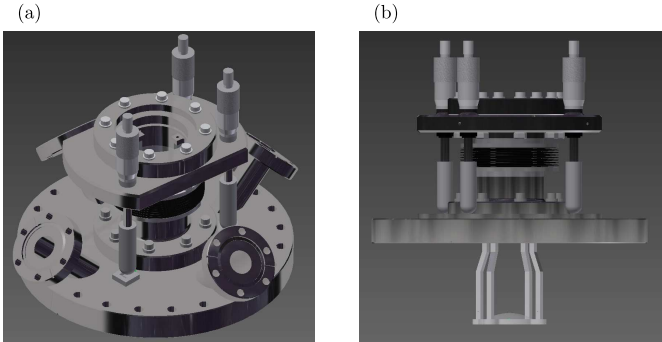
(a) CAD view of the complete assembly connected to the top 10" flange of the main vacuum chamber. (b) Side view of the CAD assembly showing the lens mount and mounting rods connecting to the bellows. The rods are designed such that when the bellows are at half of the maximum compression, the lens is in focus with the center of the vacuum chamber.
